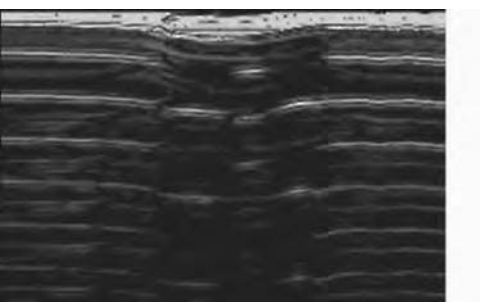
Crack at the center of a low-carbon steel weld
